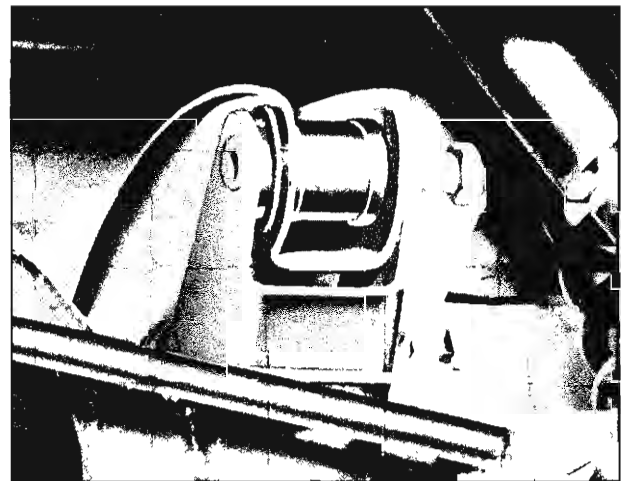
Installing Upper Control Arm to Axle Housing Bracket
